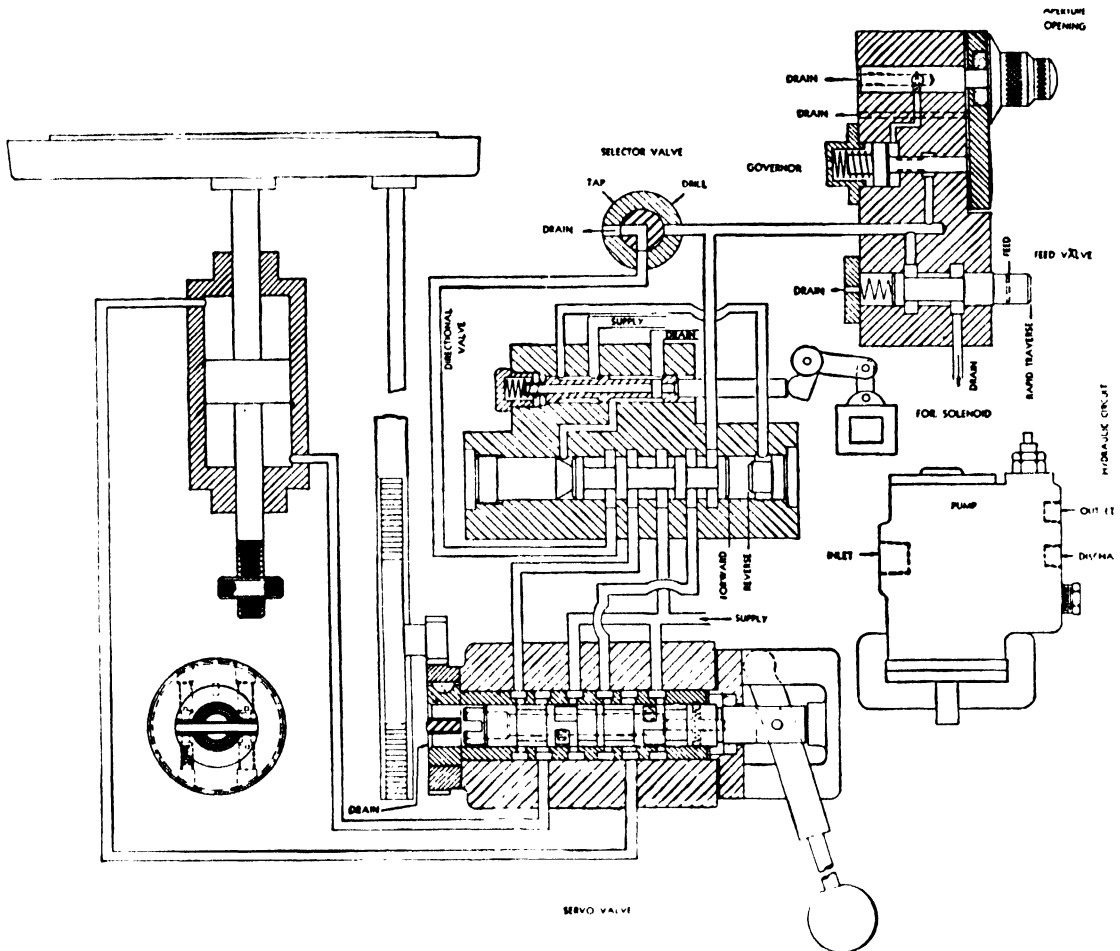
Hydraulic circuit of G-5 Nateco tapper and driller. (The National Automatic Tool Co., Richmond, Indiana.)
